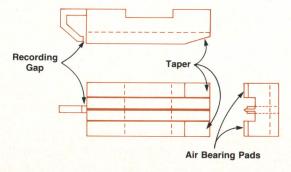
Views of recording head showing air bearing pads and tapered edges.
